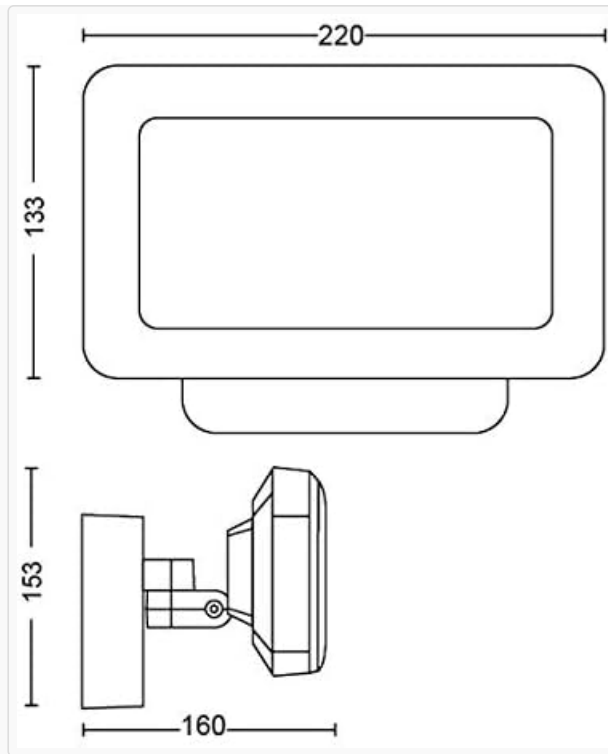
A technical drawing illustrating the dimensions of the Philips Hue Discover light fixture in millimeters.
